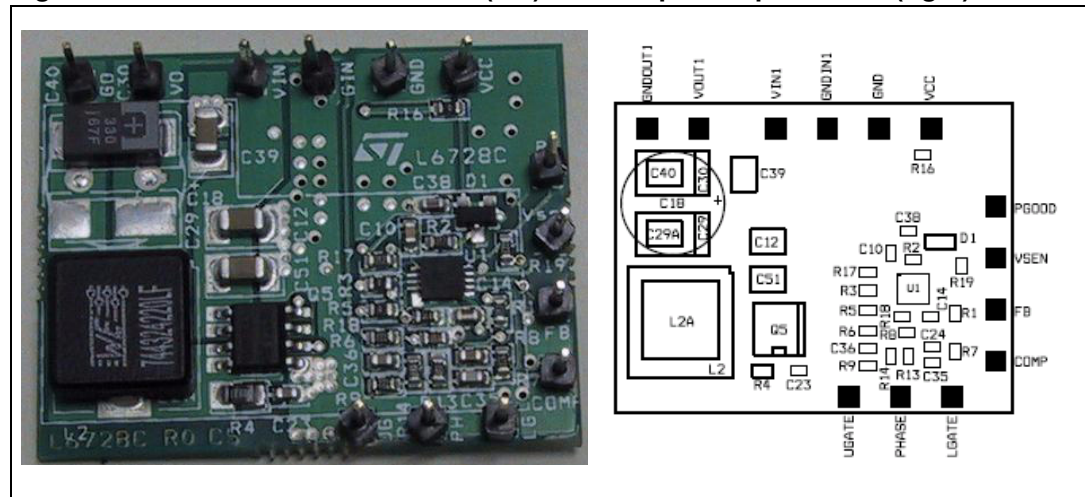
5 A demonstration board top (left) and bottom (right) layers
